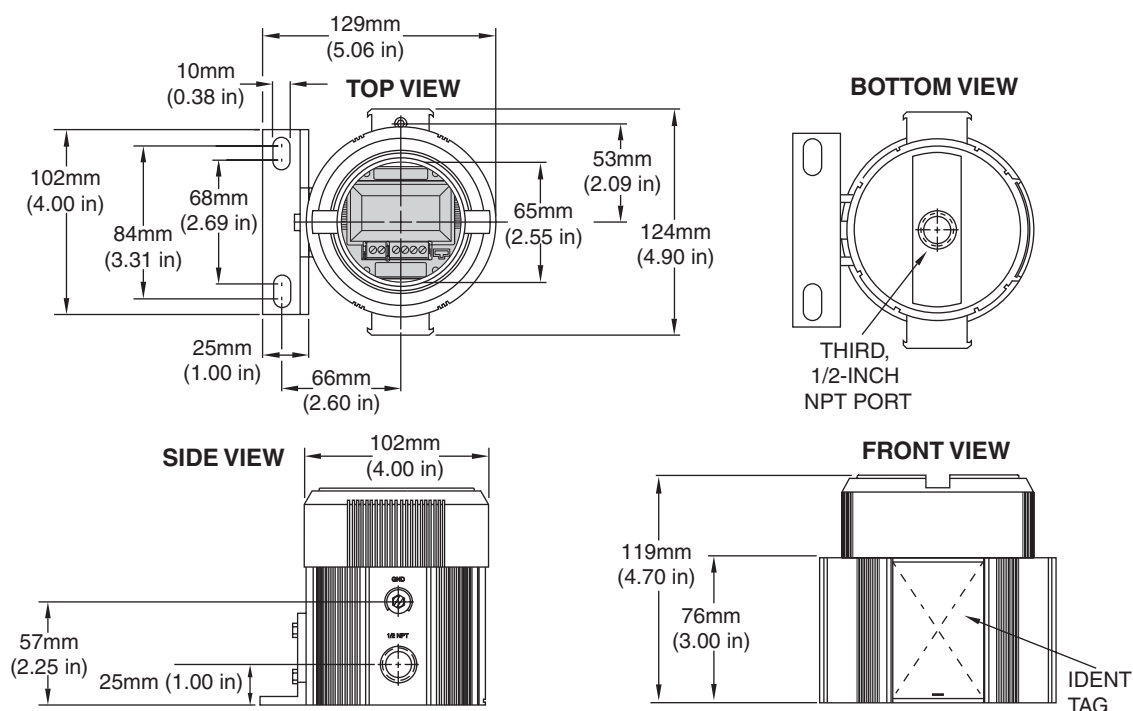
Dimensions of the TDY with the BH explosion-proof enclosure.
